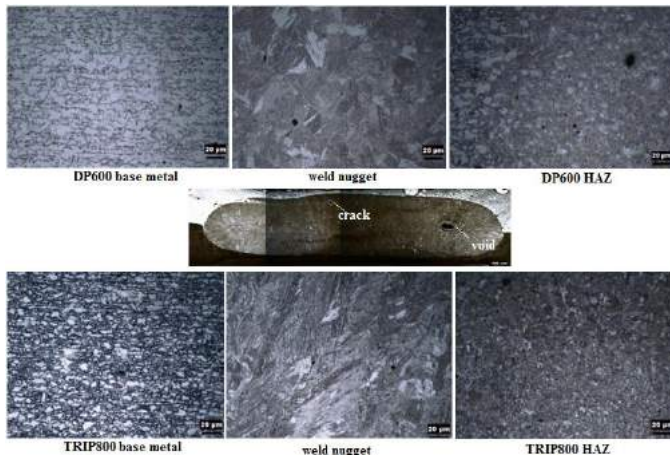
DP600/TRIP800 weldment joined with 5 kN electrode force at 7kA welding current for 20 cycles welding time
